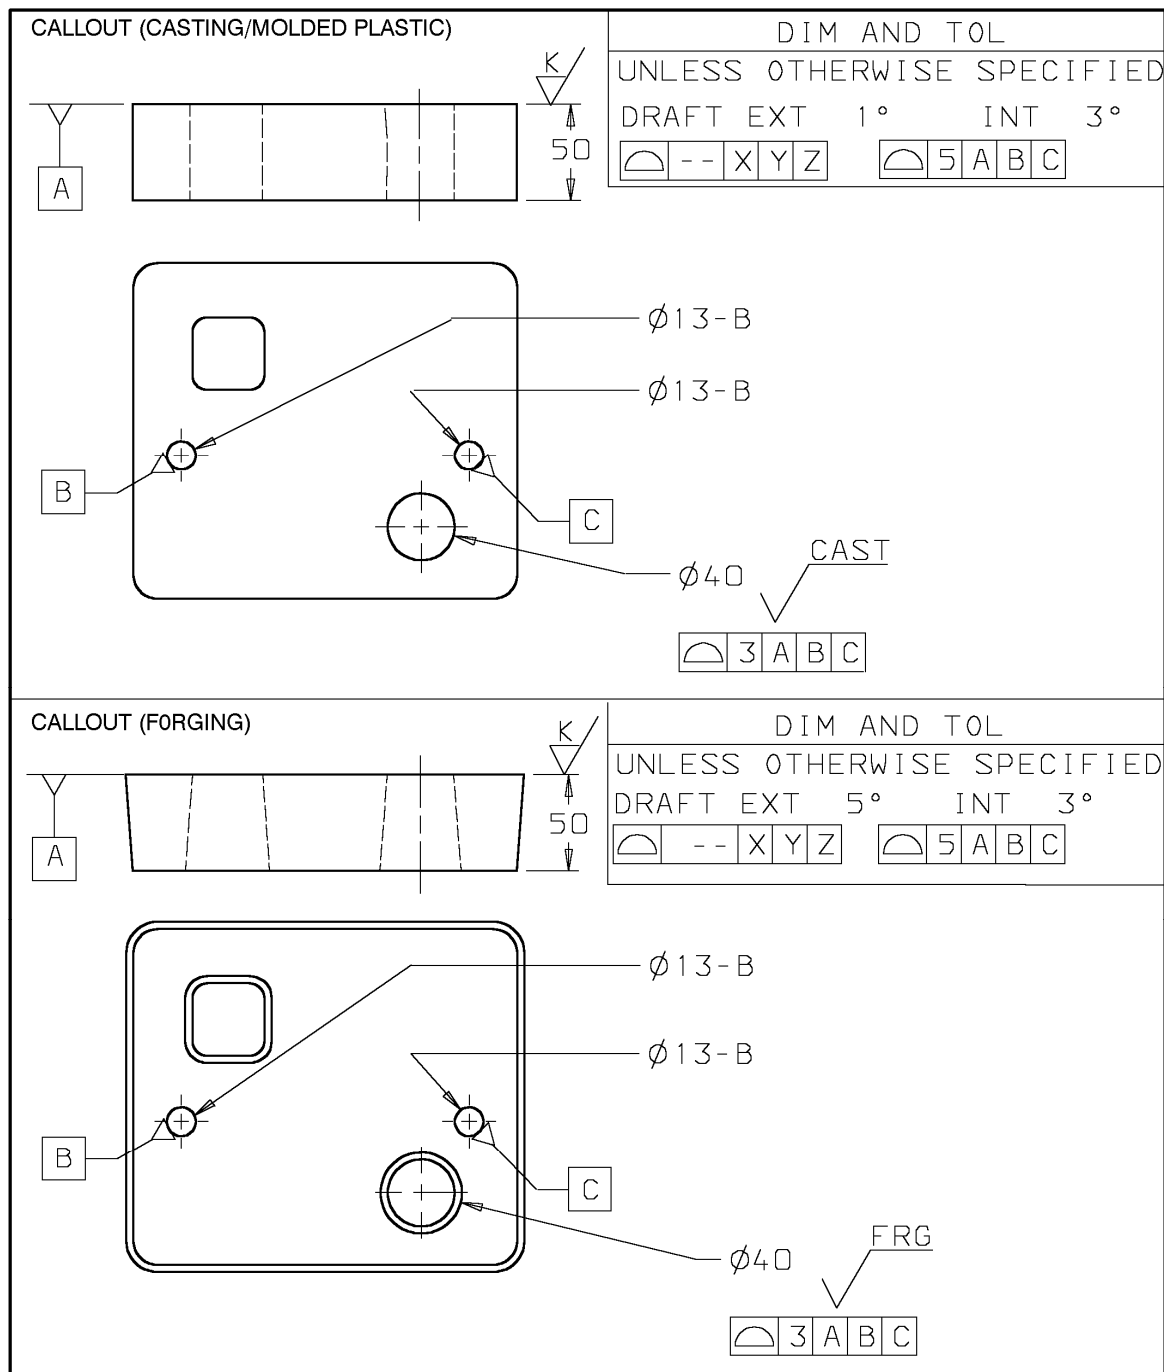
Profile Of A Surface Control Of Cast, Forged, Or Molded Plastic Surfaces On The Completed Component (Callouts)
